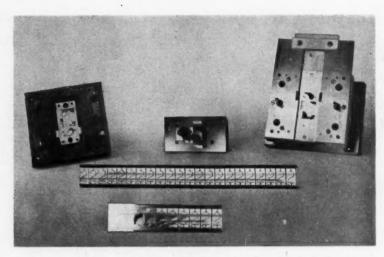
Number 2 Anodes (foreground) are Produced with this Tool. The Three Basic Parts are the Punch (centre), Die (right) and Punch Guide (left, lower face up)
